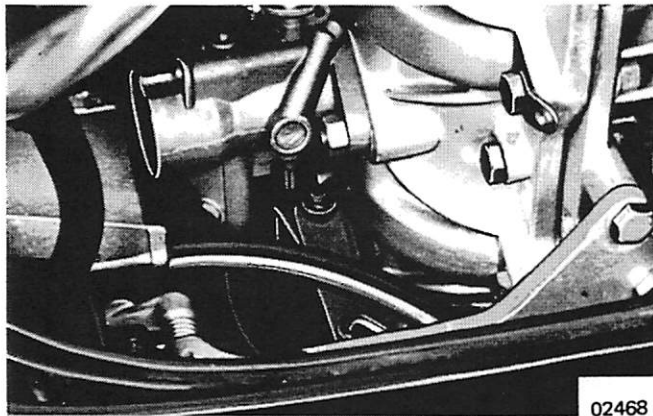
Throttle-Shift Linkage and Upper Shift Shaft
